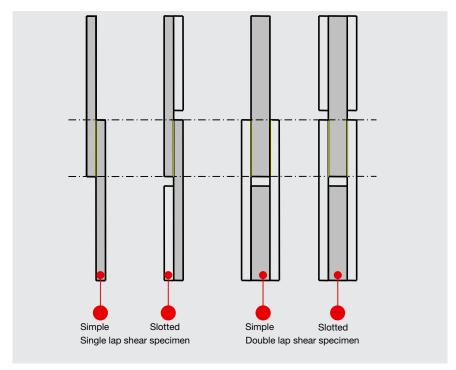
Lap-shear tests are carried out on simple or slotted single or double-lap specimens.
